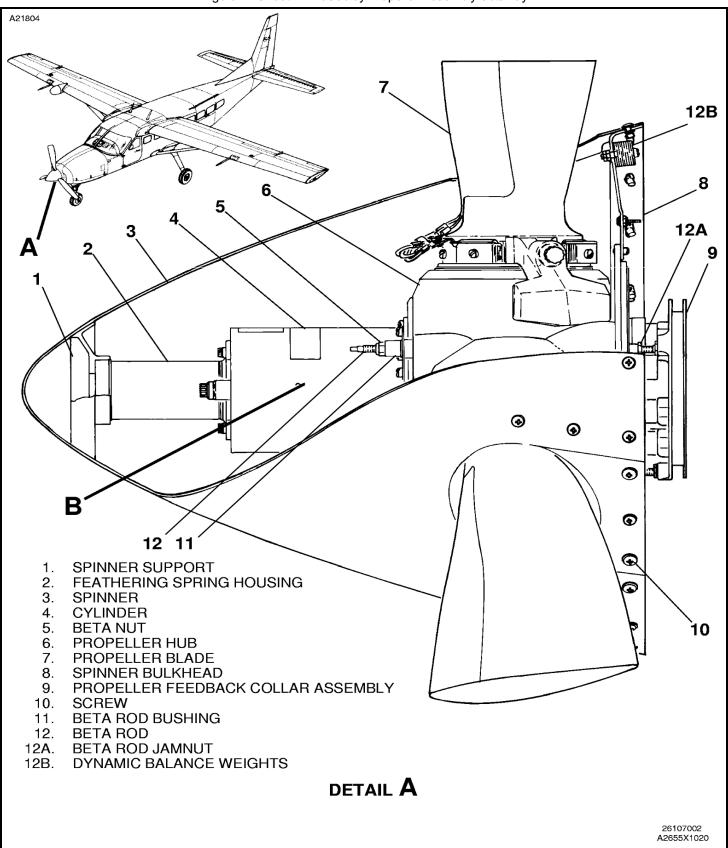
Sheet 1: McCauley Propeller Assembly Cutaway
